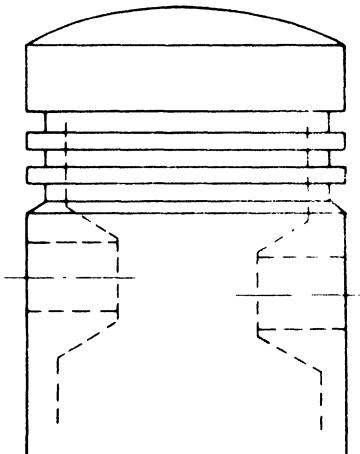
Possible misaligned condition of wrist-pin bearing holes; misalignment shown exaggerated.
